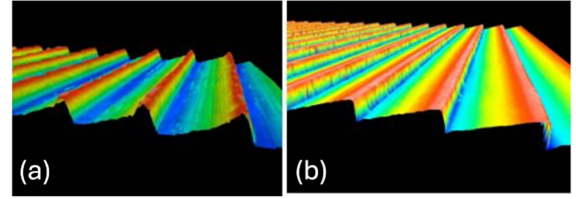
Topography obtained from confocal microscopy for the grating manufactured using micromachining techniques by (a) milling and (b) femtosecond laser ablation.
